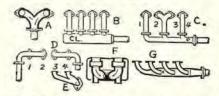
Exhaust manifolds: A good method of exhaust outlet for a 2- or 4-cylinder vertical engine is shown in Fig. 73 at A.
